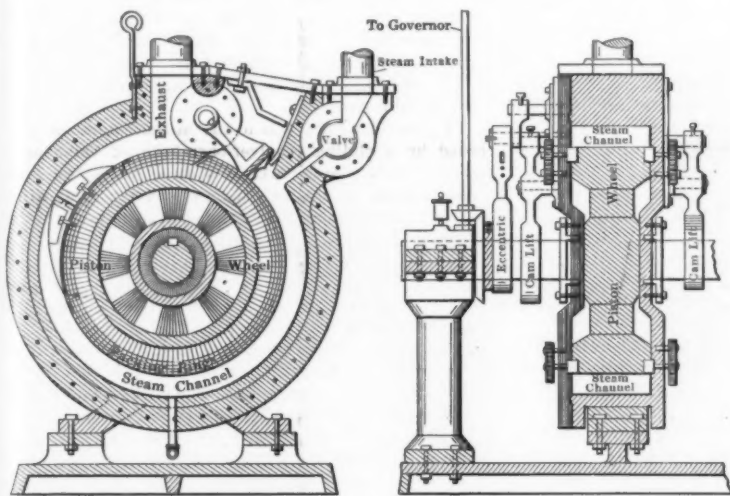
SECTIONAL VIEW OF SCHMIDT'S ENGINE.
